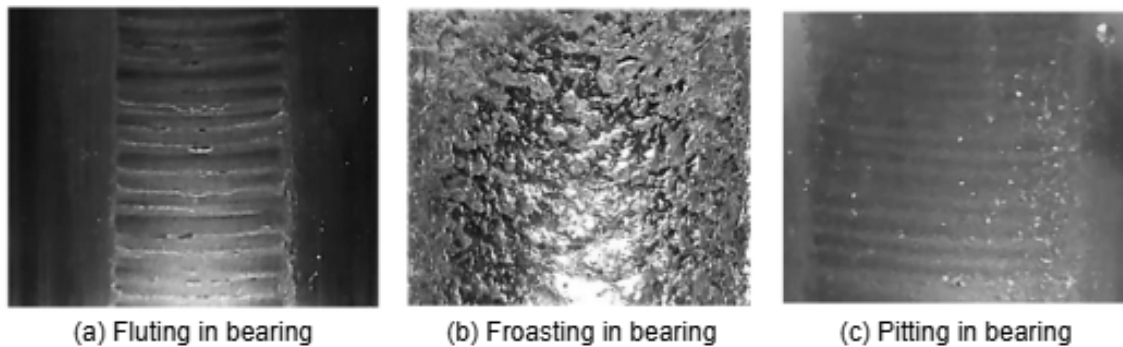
Zoomed View of Damages caused by Shaft Current [13]:(a) Fluting, (b) Froasting, and (c) Pitting
